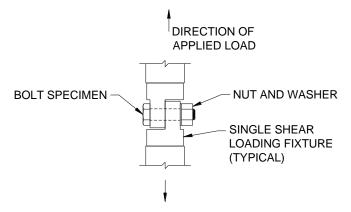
Drawing Showing Bolt Single Shear Test Setup
